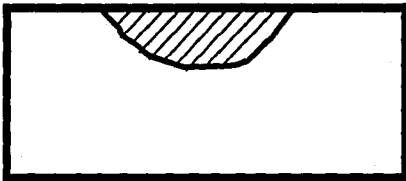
Autogenous laser weld sample geometry
